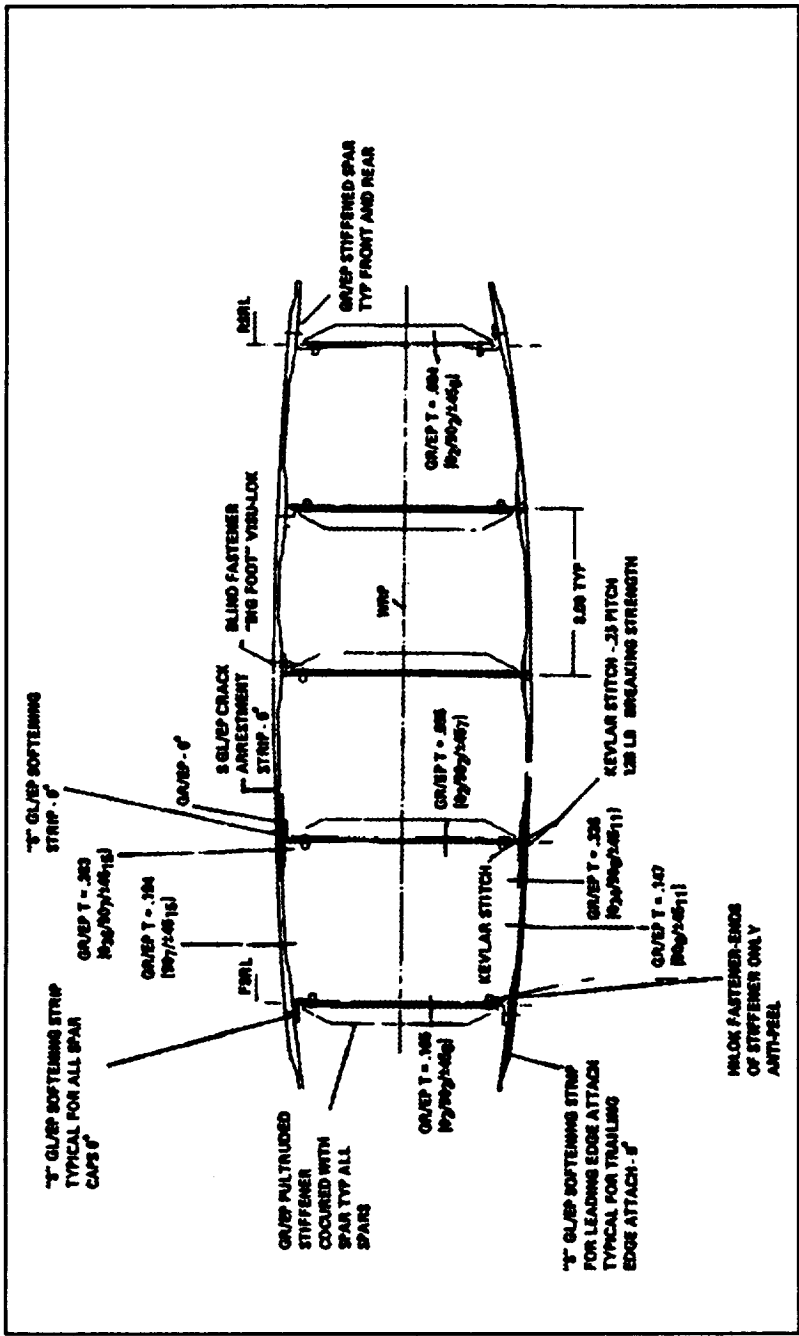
Detailed VSTOL Wing Structural Arrangement (Section C-C)
